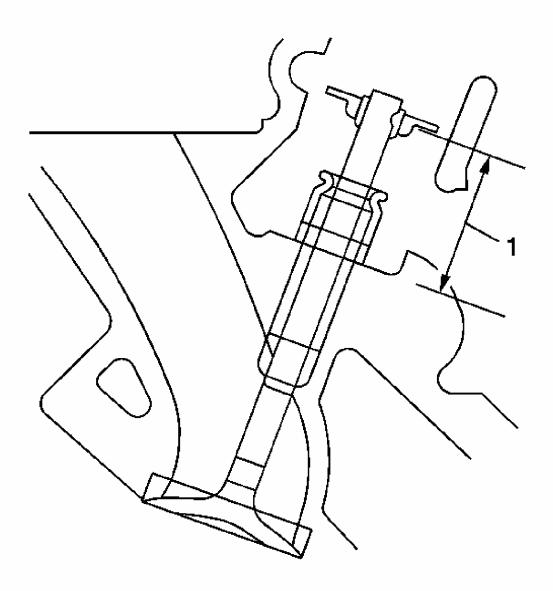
Measuring Valve Stem Height Courtesy of GENERAL MOTORS CORP.
